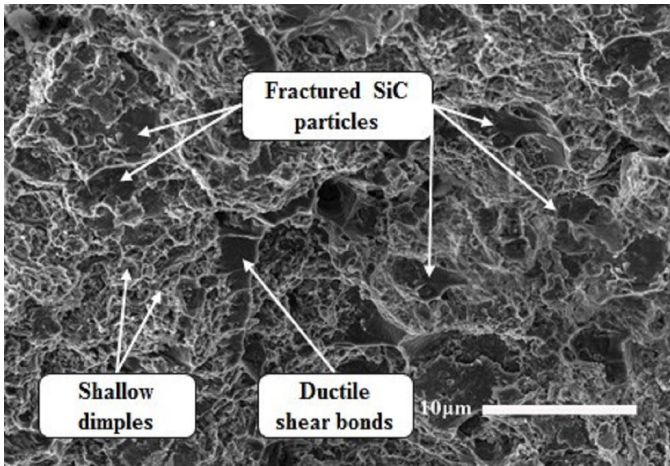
Fractured surface of cold extruded Al-8wt.% SiC MMC
